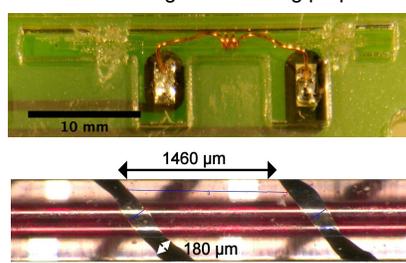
Pictures of a wire coil in the holder and an inkjet printed silver coil.
